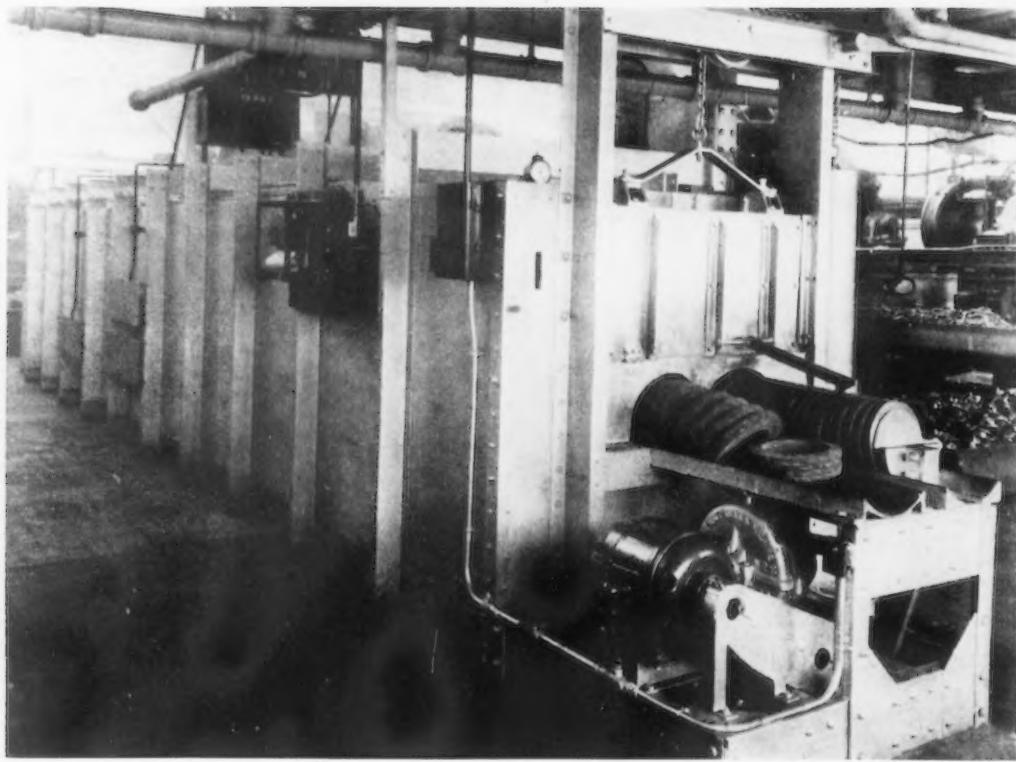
In this three-zone counterflow furnace, 32 ft. long, rear axle drive gear forgings are normalized. Output is 18 lb. per kwhr. net.
